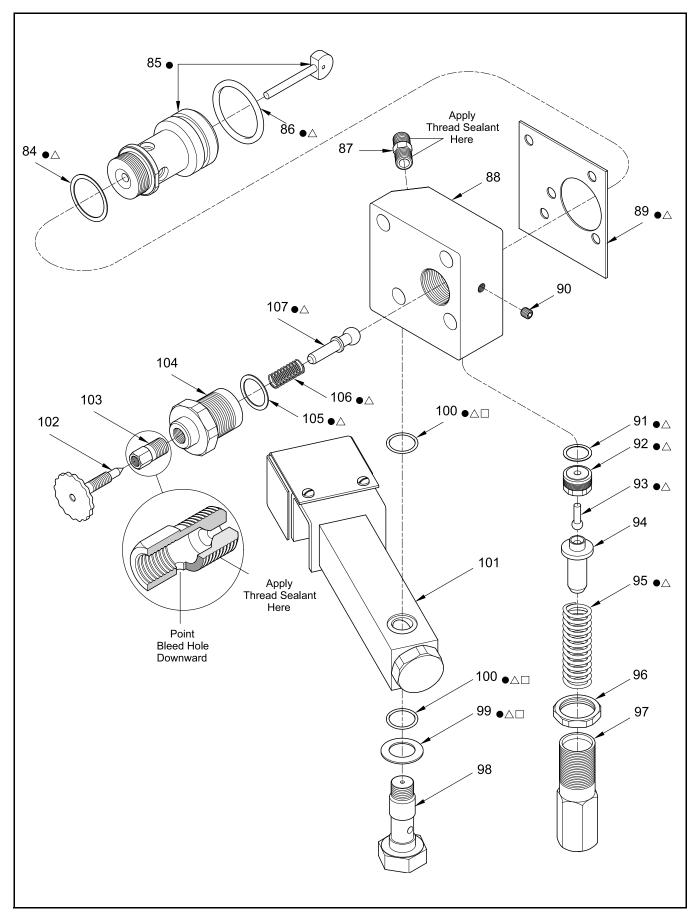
C Pressure Switch and Valve Body Assembly - Exploded View
